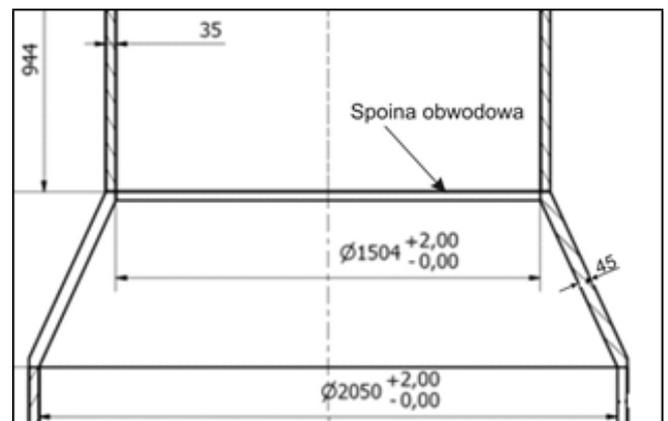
Fragment of the upper part of the boiler shell with the girth weld (marked) containing the highest number of cracks
